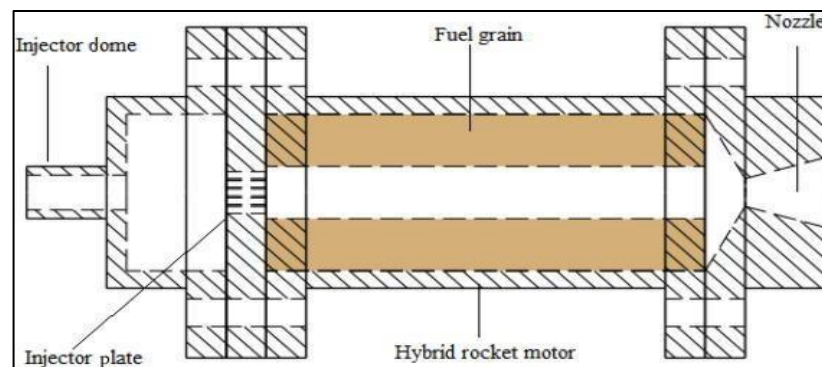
Cross-sectional mechanical drawing of the hybrid rocket engine [3], [25]
